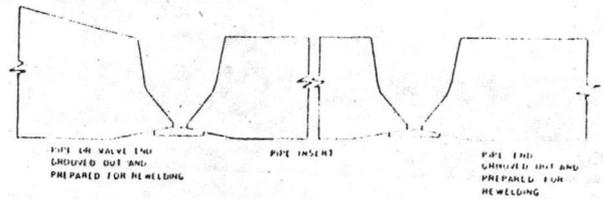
Sketch illustrating inserting of pipe section to compensate for several weld joints completely grooved out, pulled together, fitted-up and rewelded
